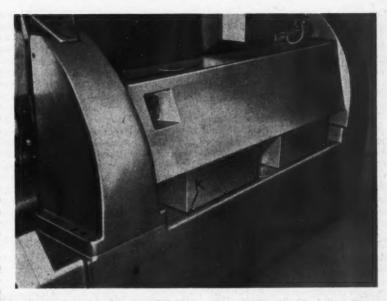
Rear view of the type CLP-10 comparator, showing the column assembly which incorporates an integral tie beam
